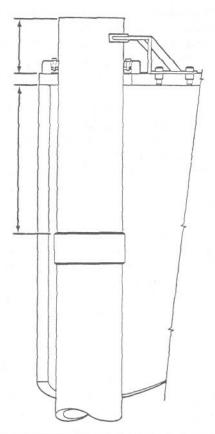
Casing is oriented by using the fixture supplied by the wellhead manufacturer, and slip bowls are welded solidly to the template. (*Courtesy Gray Tool Co.*)
